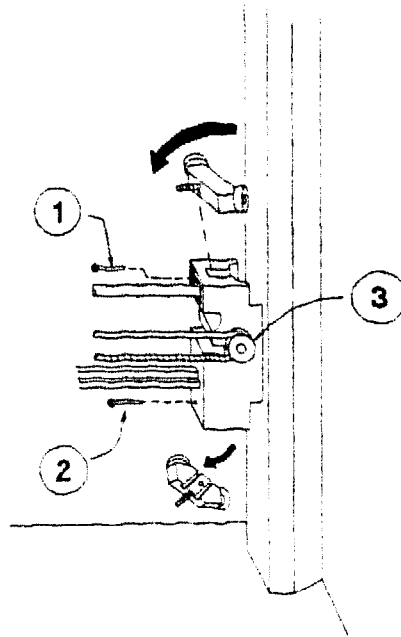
Removing the Top and Bottom Bearing Block Assemblies
